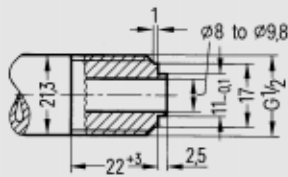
/133 Tapping sockets with threaded connection, dimensions
